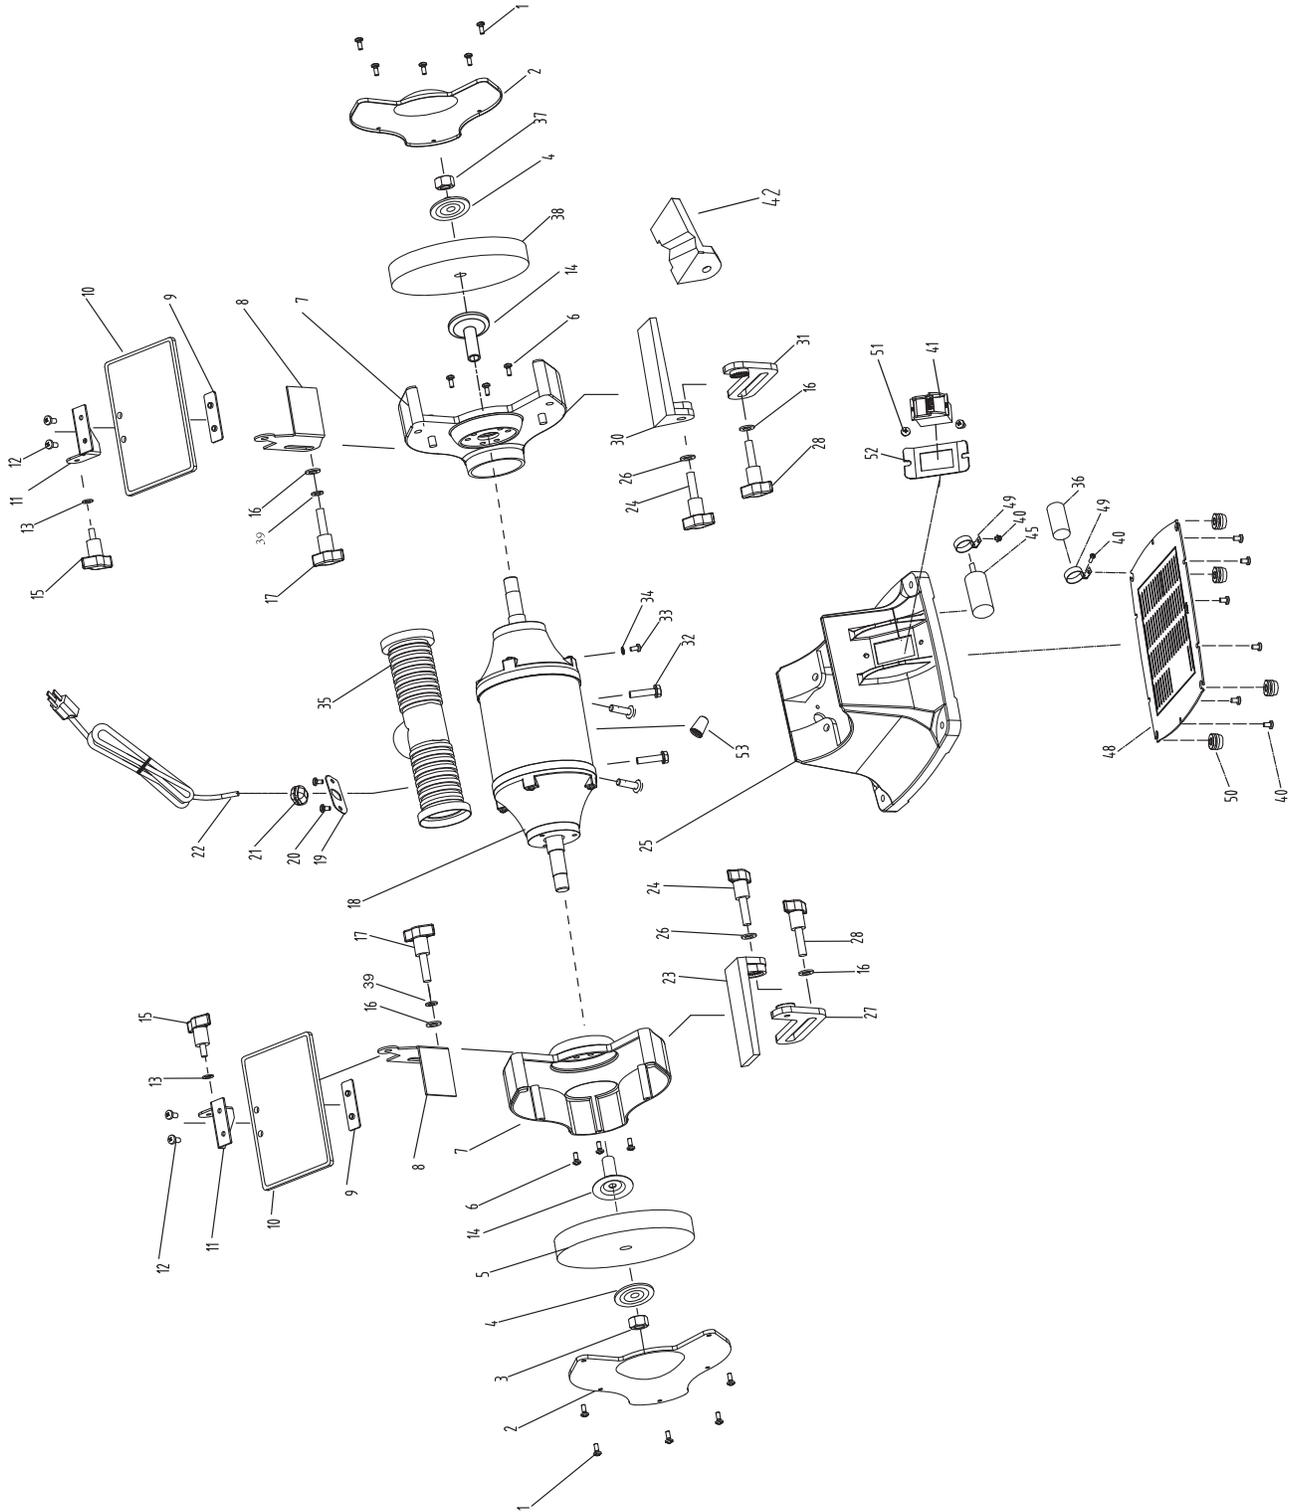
Repair Parts Illustration for 9682075A, 10" Bench Grinder
